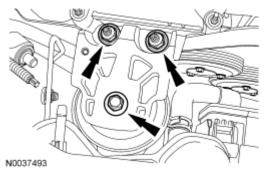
Locating Engine Mount Bracket Bolt And Nuts Courtesy of FORD MOTOR CO.
